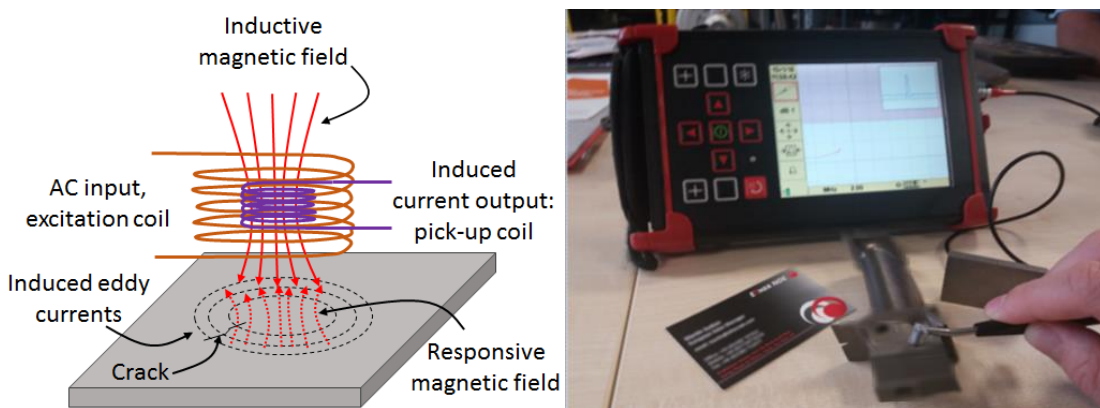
illustration of eddy current inspection on a pipe (left), and photo of EC inspection on a component (right), courtesy of Ether NDE Ltd.
